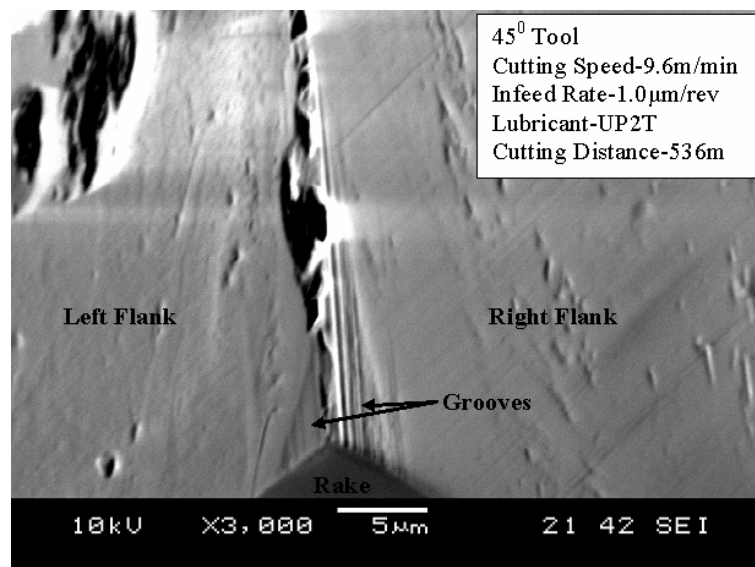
SEM image of a 45° tool (tool-9) after 536m cutting distance
